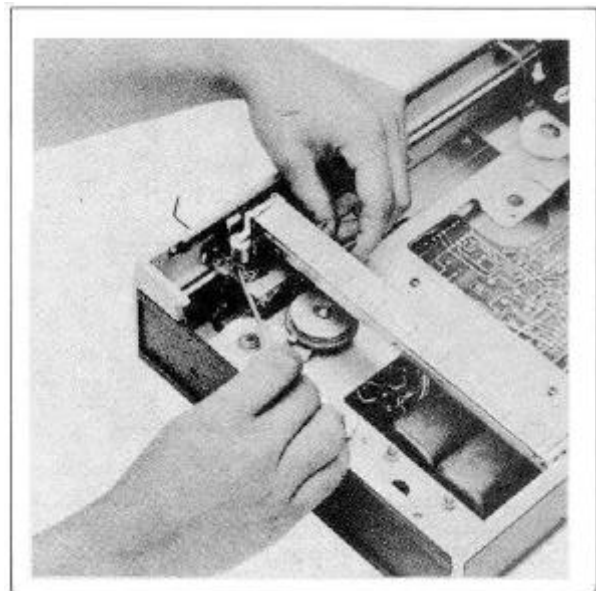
Y-AXIS BACKLASH ADJUSTMENT (GEAR LOCKING SCREW)
